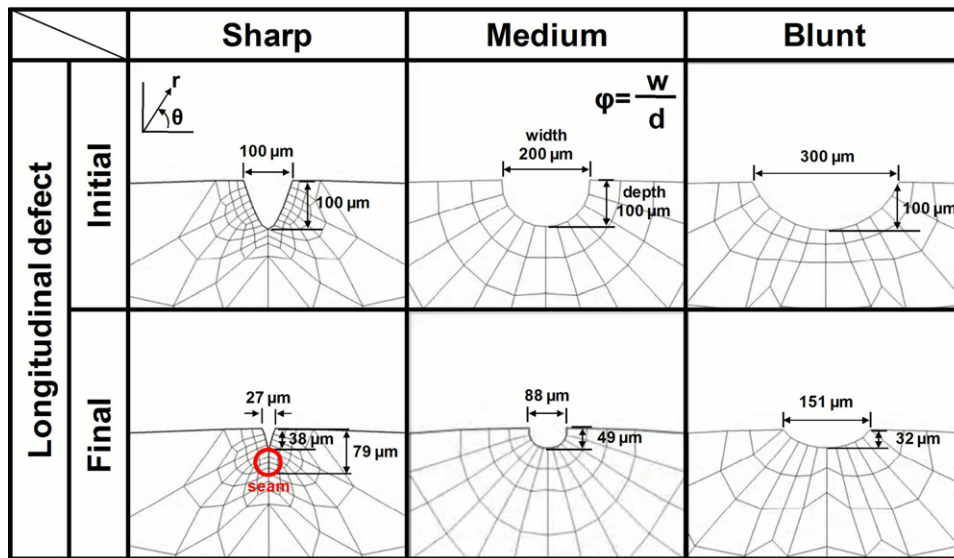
Deformed shapes of the longitudinal surface defects after the single-pass wire drawing.
